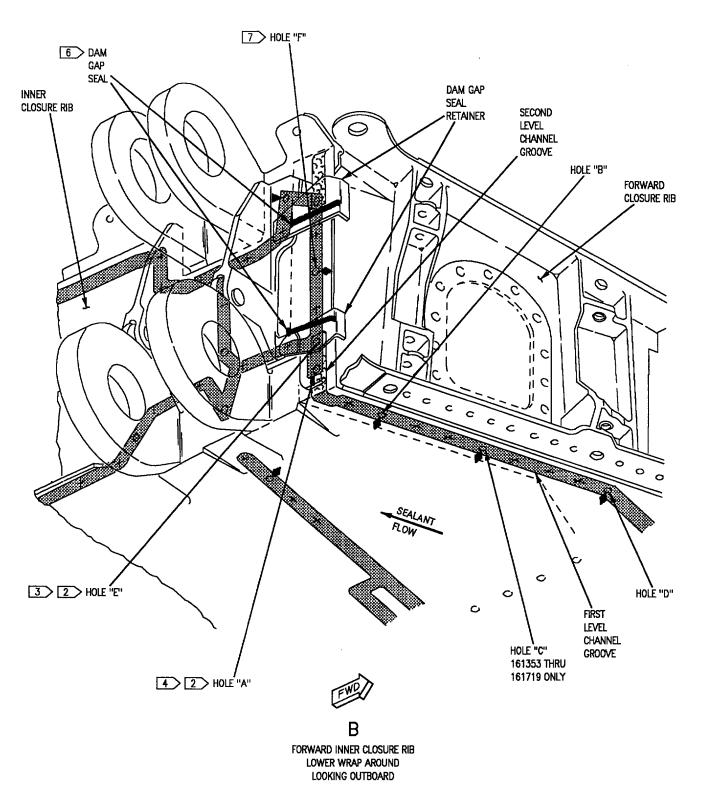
Closure Rib Channel Groove Seal Injection (Sheet 3)
